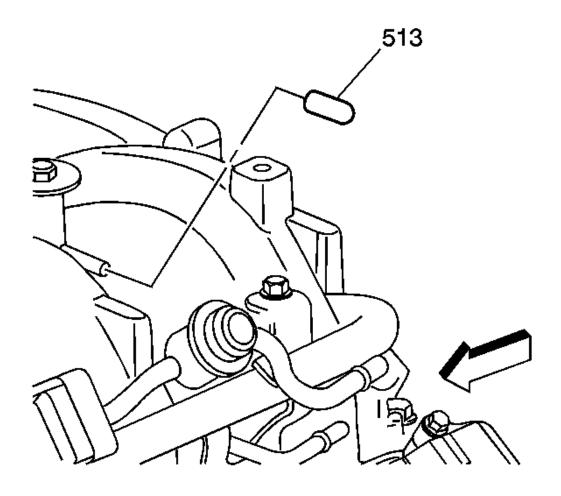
View Of Vacuum Plug Courtesy of GENERAL MOTORS CORP.
